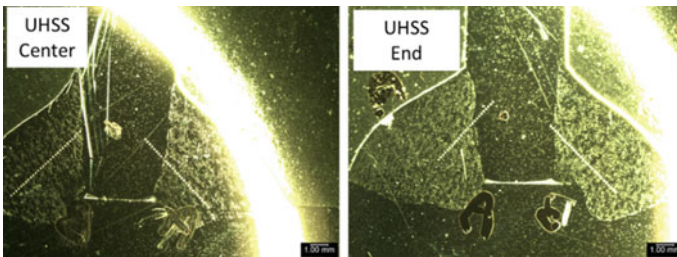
UHSS-100 T-weld joint hardness traverse for the 'Center' section (left) and 'End' section (right) for welds on both sides (side-A and side-B)
